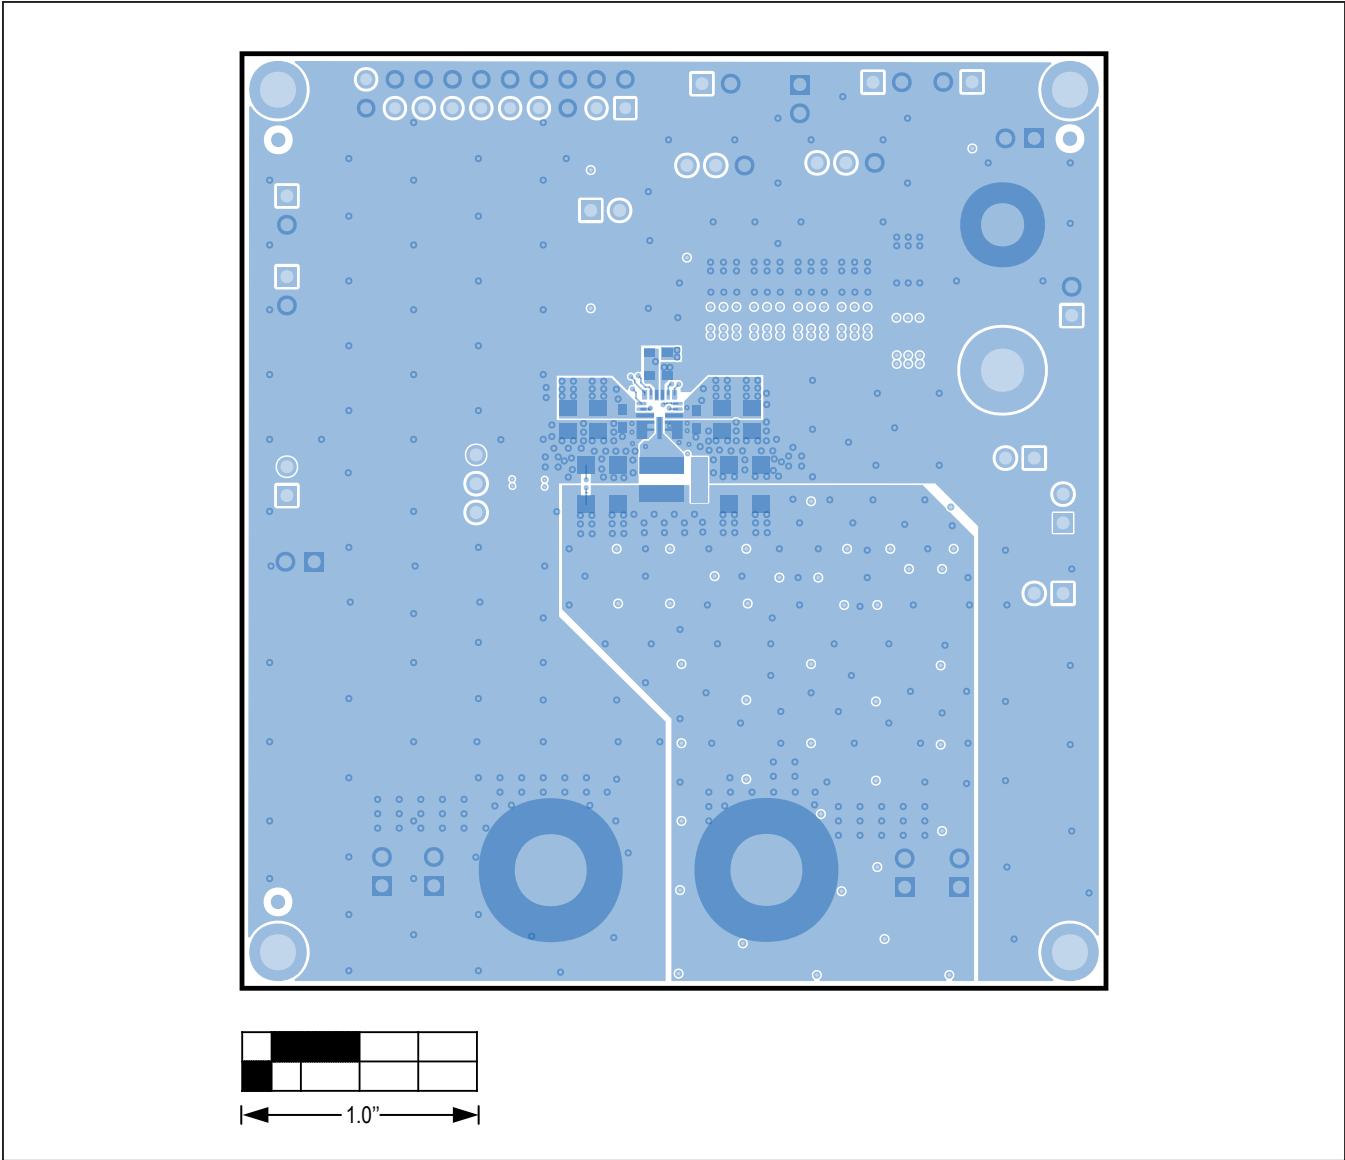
MAX20499A EV Kit Component Placement Guide—Top Layer
